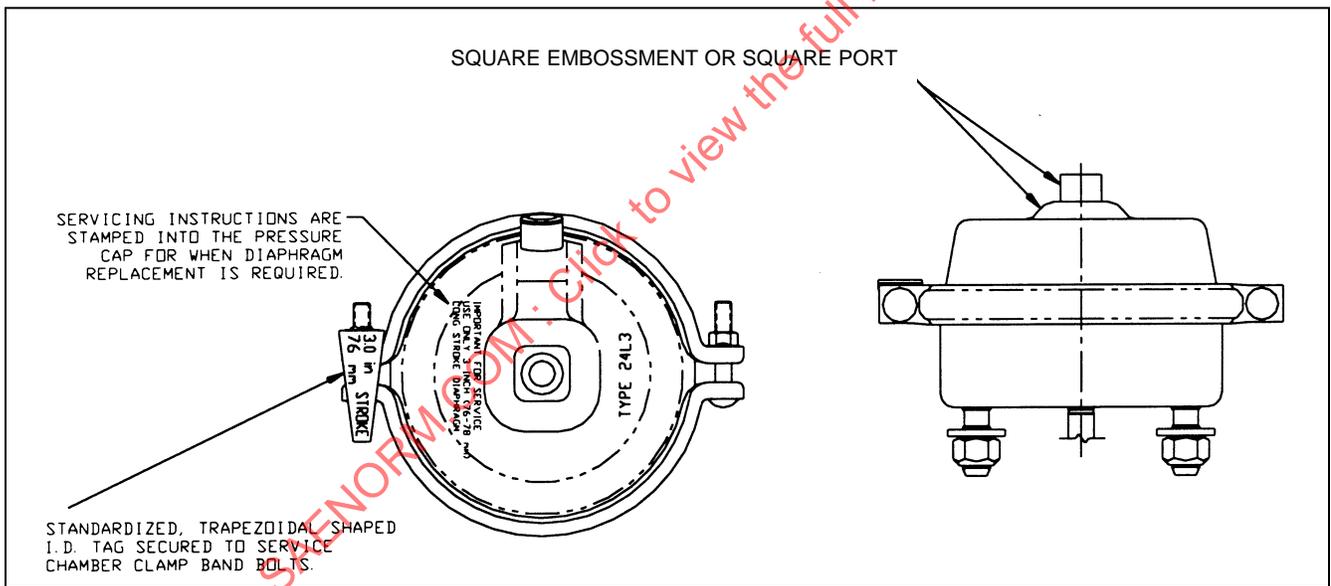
76.2 mm (3.00 in) LONG-STROKE SERVICE CHAMBER IDENTIFICATION
